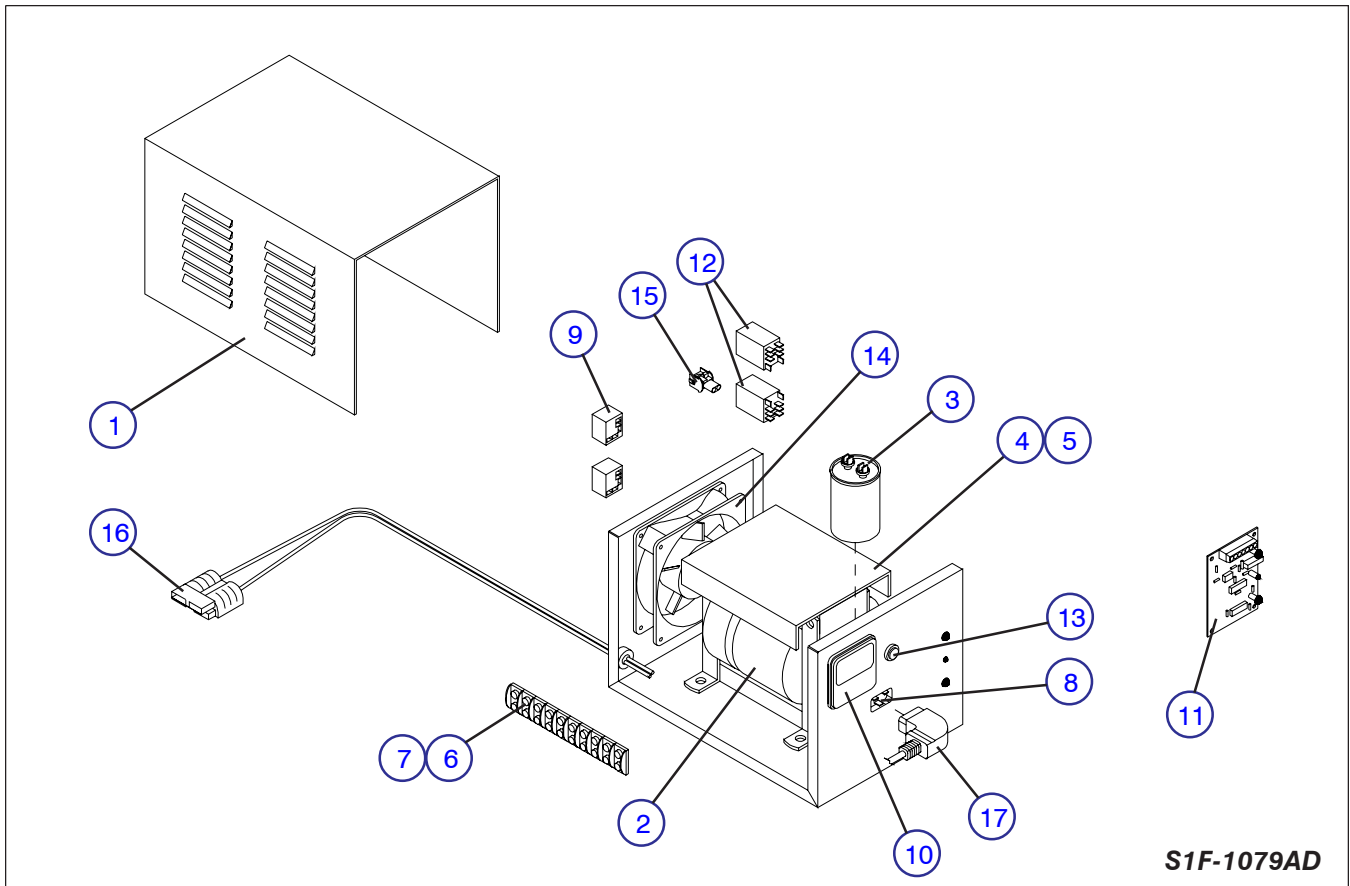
D. BATTERY CHARGER ASSEMBLY (Bycan Model 2440A and 2440E)
